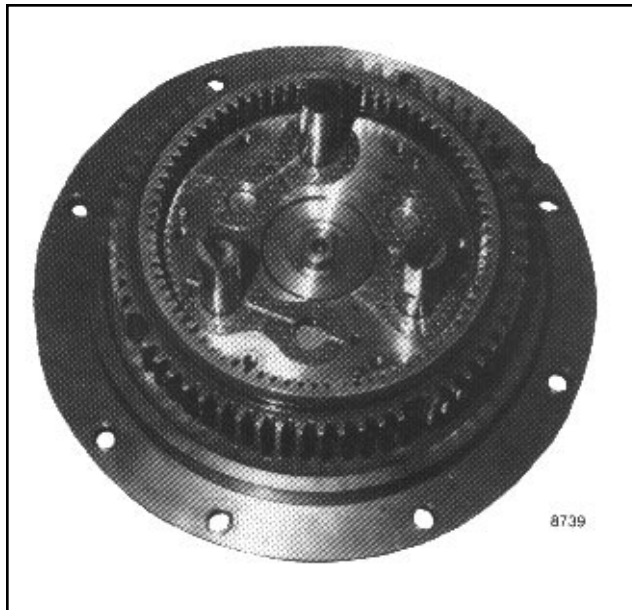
INSTALLING THE PLANETARY GEAR SHAFTS AND THRUST WASHERS
